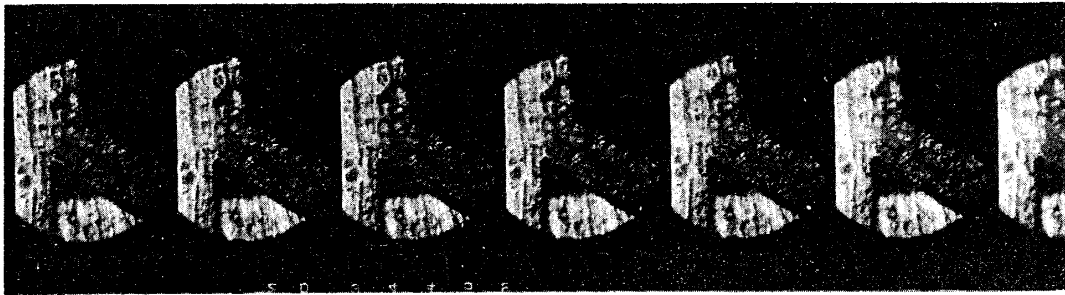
Mild Steel, the Built-up Edge with the Flattened Edge Tool (No Etching).
